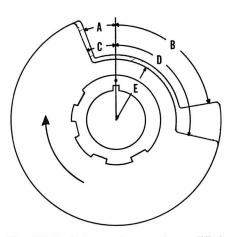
Rotary valve may be modified to alter performance. Refer to text for exact dimensions.
